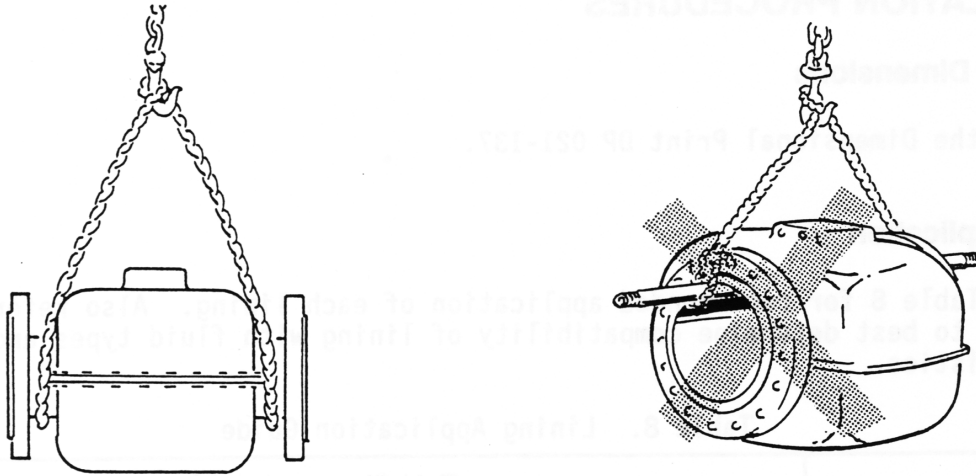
Lifting Flanged Flowtube for Horizontal Mounting
